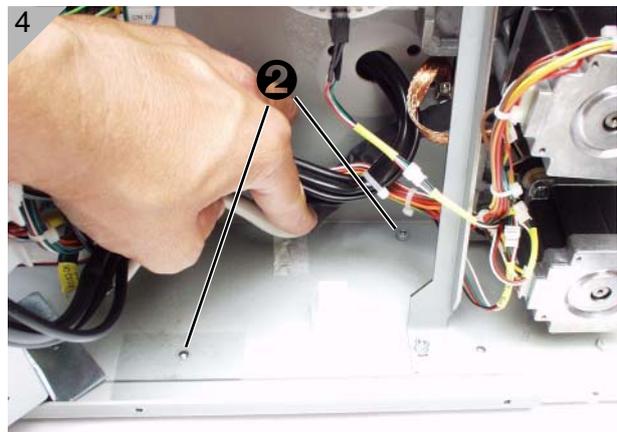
shows the two fixing holes (2) to which the PLC module is screwed. The frontal hole was beforehand used to fix the power supply. The rear hole already bears a screw which can be used to fix the PLC module.
